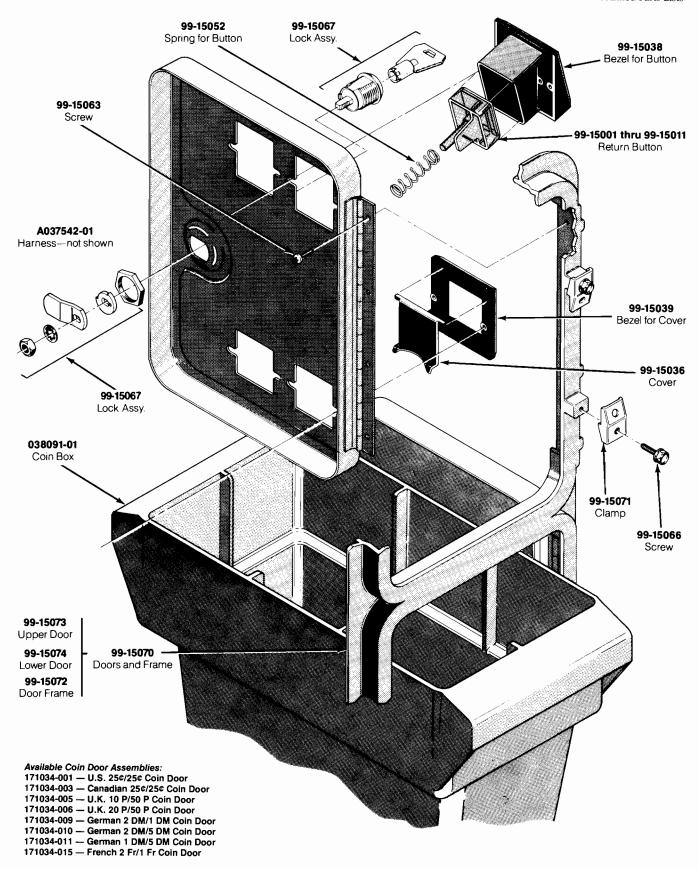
Coin Controls, Inc. Coin Door Assembly, continued 171034-xxx A
